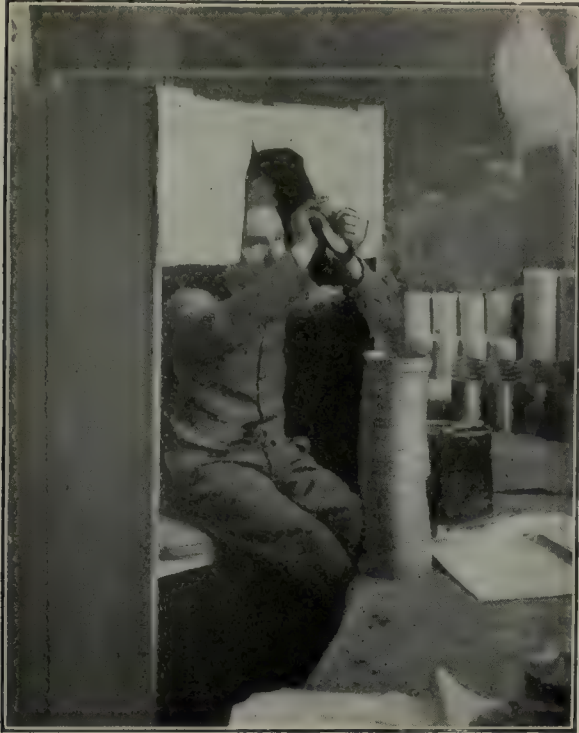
INSPECTING FOR ROUNDNESS, WHICH INVOLVES DIAMETER
